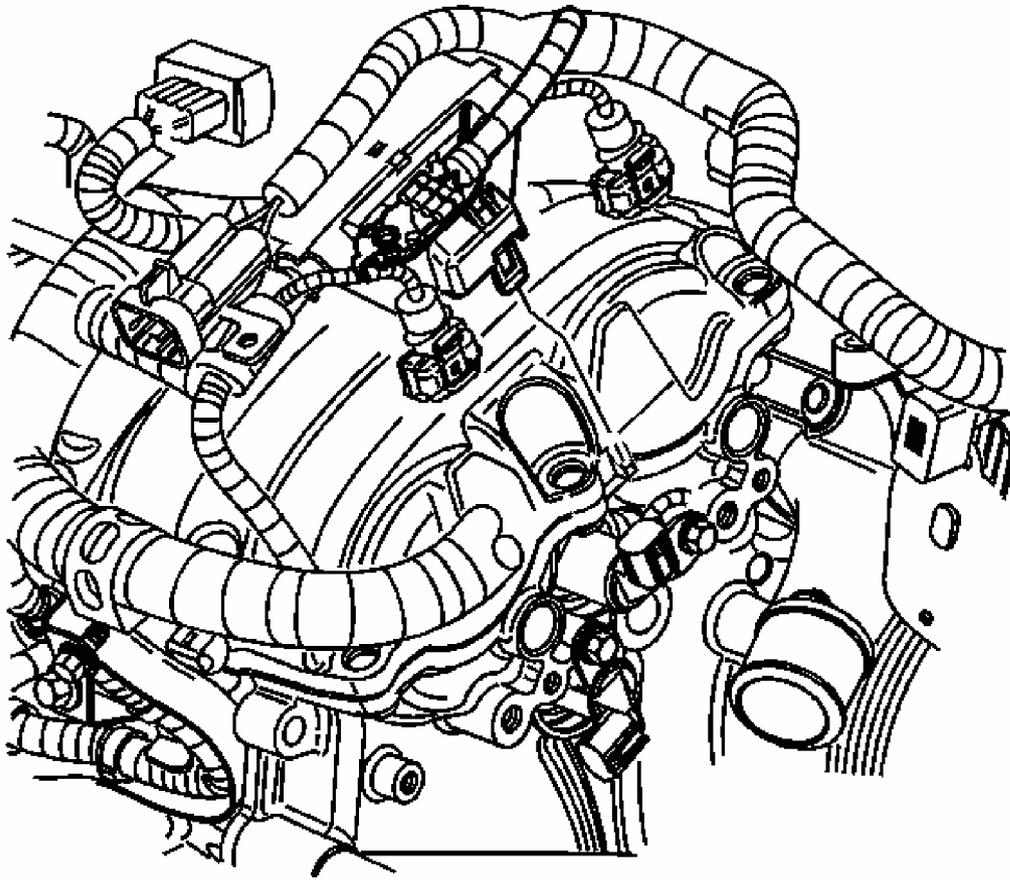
View Of Right Camshaft Cover Wiring Harness Connector - Front
